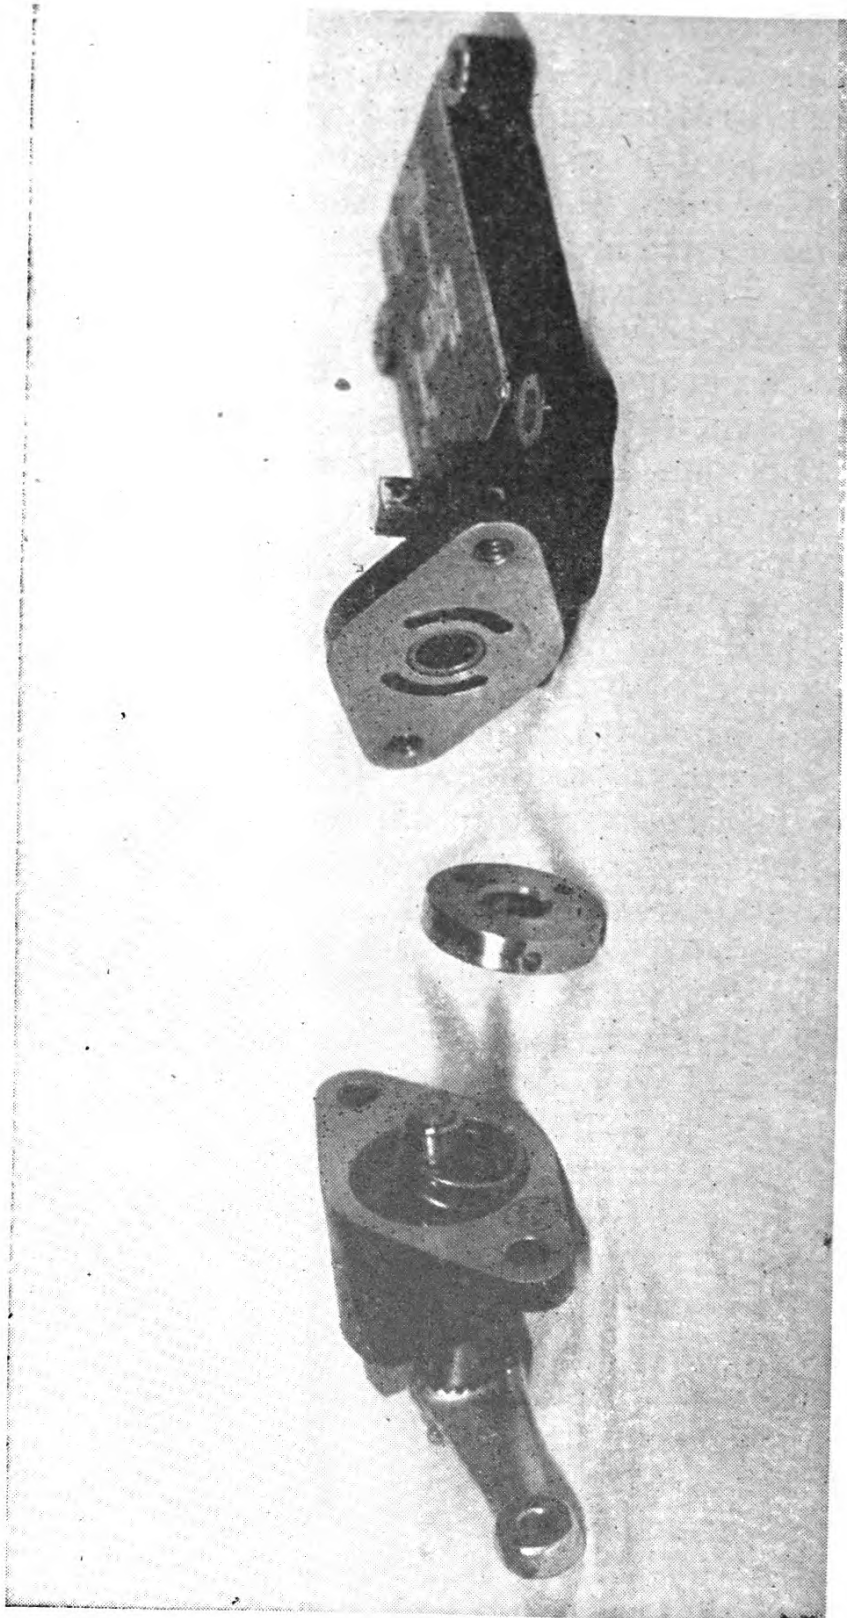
Disassembled view of mixture-control mechanism in Holley carburetor.
